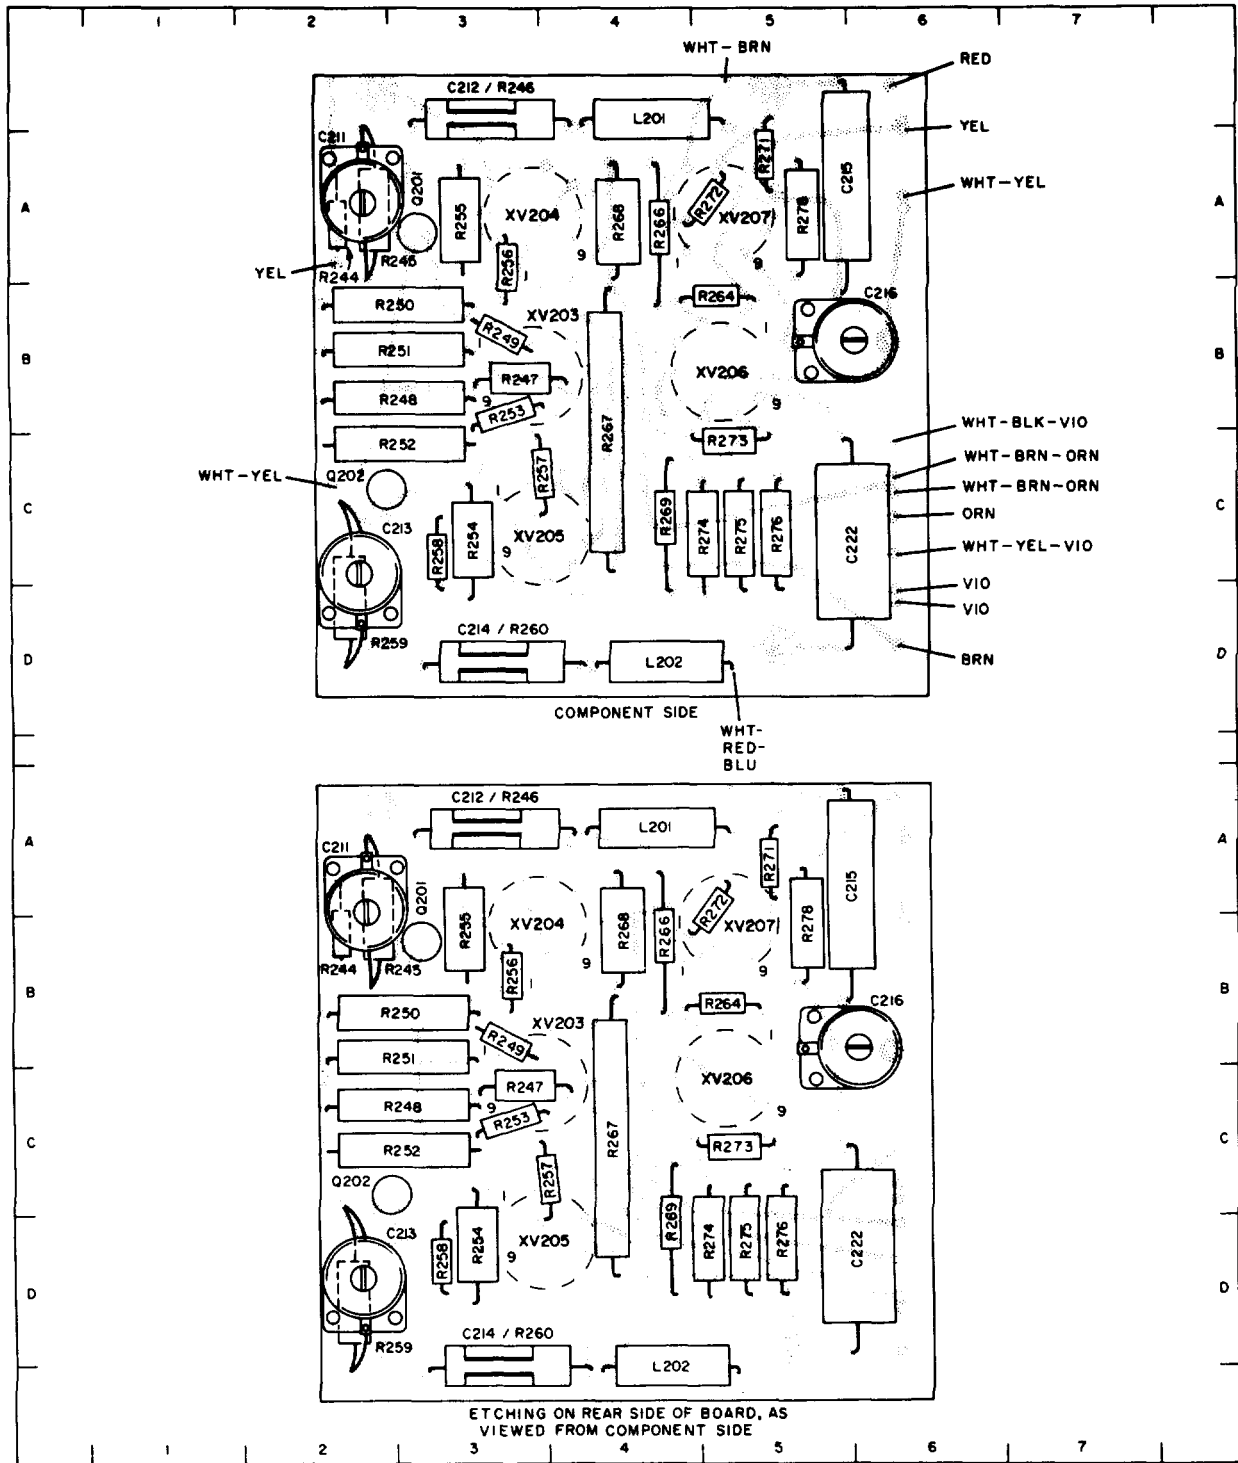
Main Horizontal Amplifier and Driver Etched Circuit Assembly, Location of Parts
